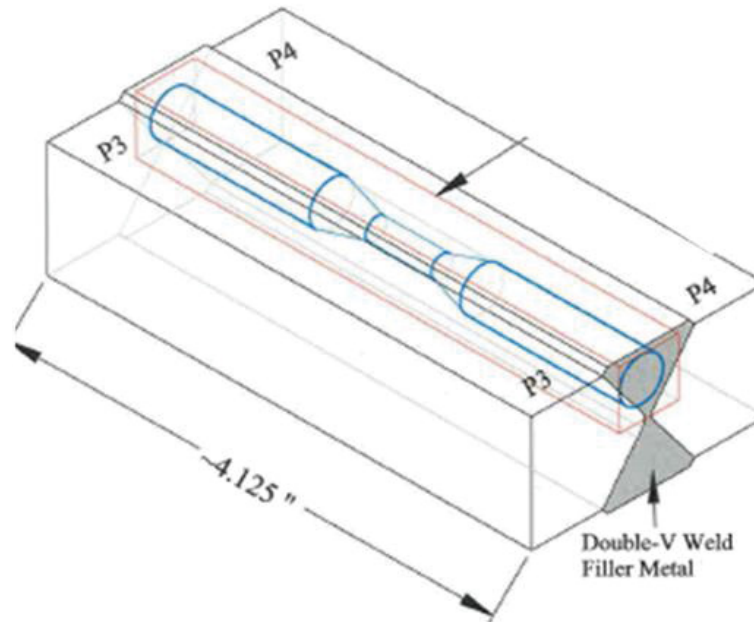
3 Location of the 316 SS-316 SS similar weld specimen (with respect to 316 SS-316 SS similar metal weld plates).
